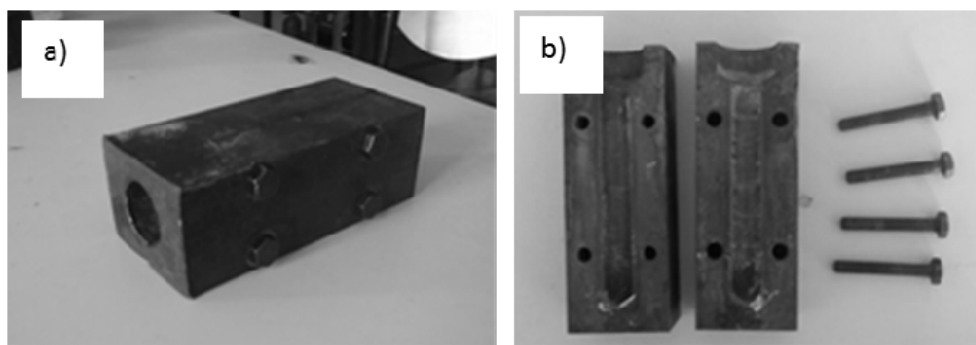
Mold for tensile test pieces before casting (a) and dismantled (b)
